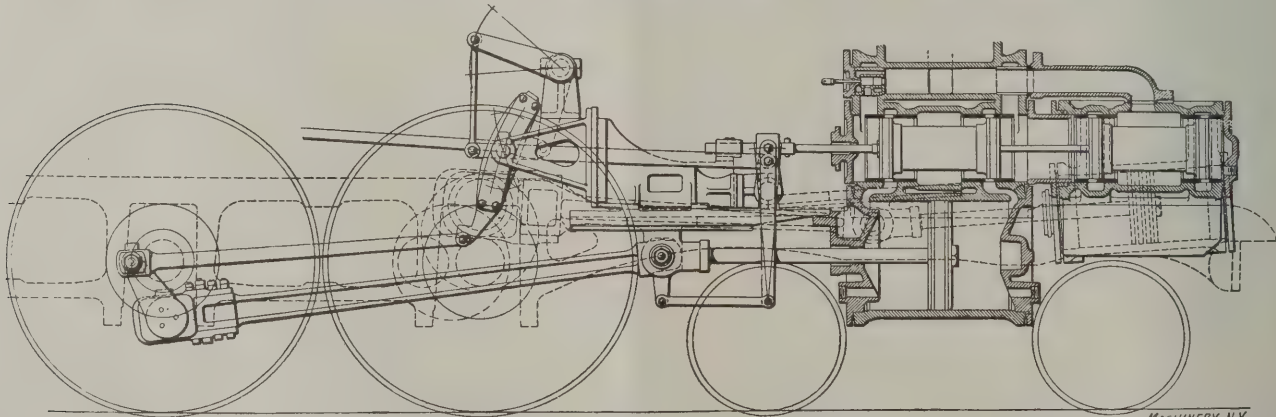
Walschaerts Valve Gear, and Section through Low-pressure Cylinder and Valve Chamber.
